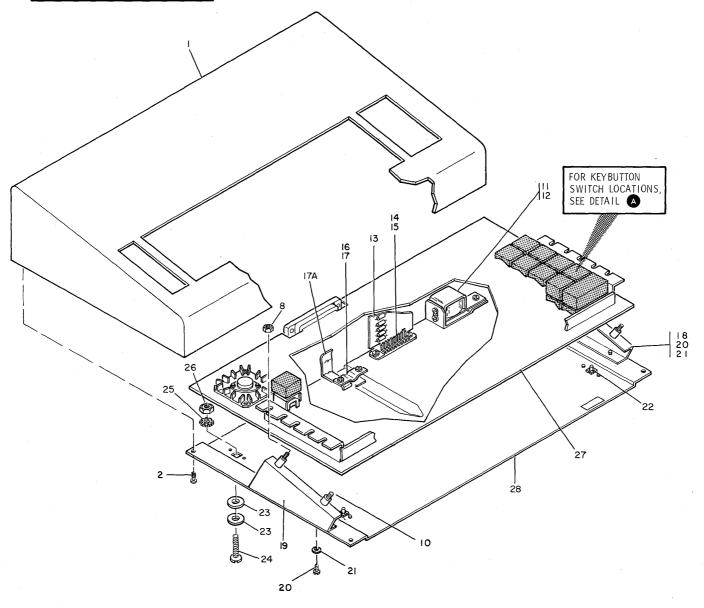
KEYBOARD ASSEMBLY. SHEET 6 OF 6.
